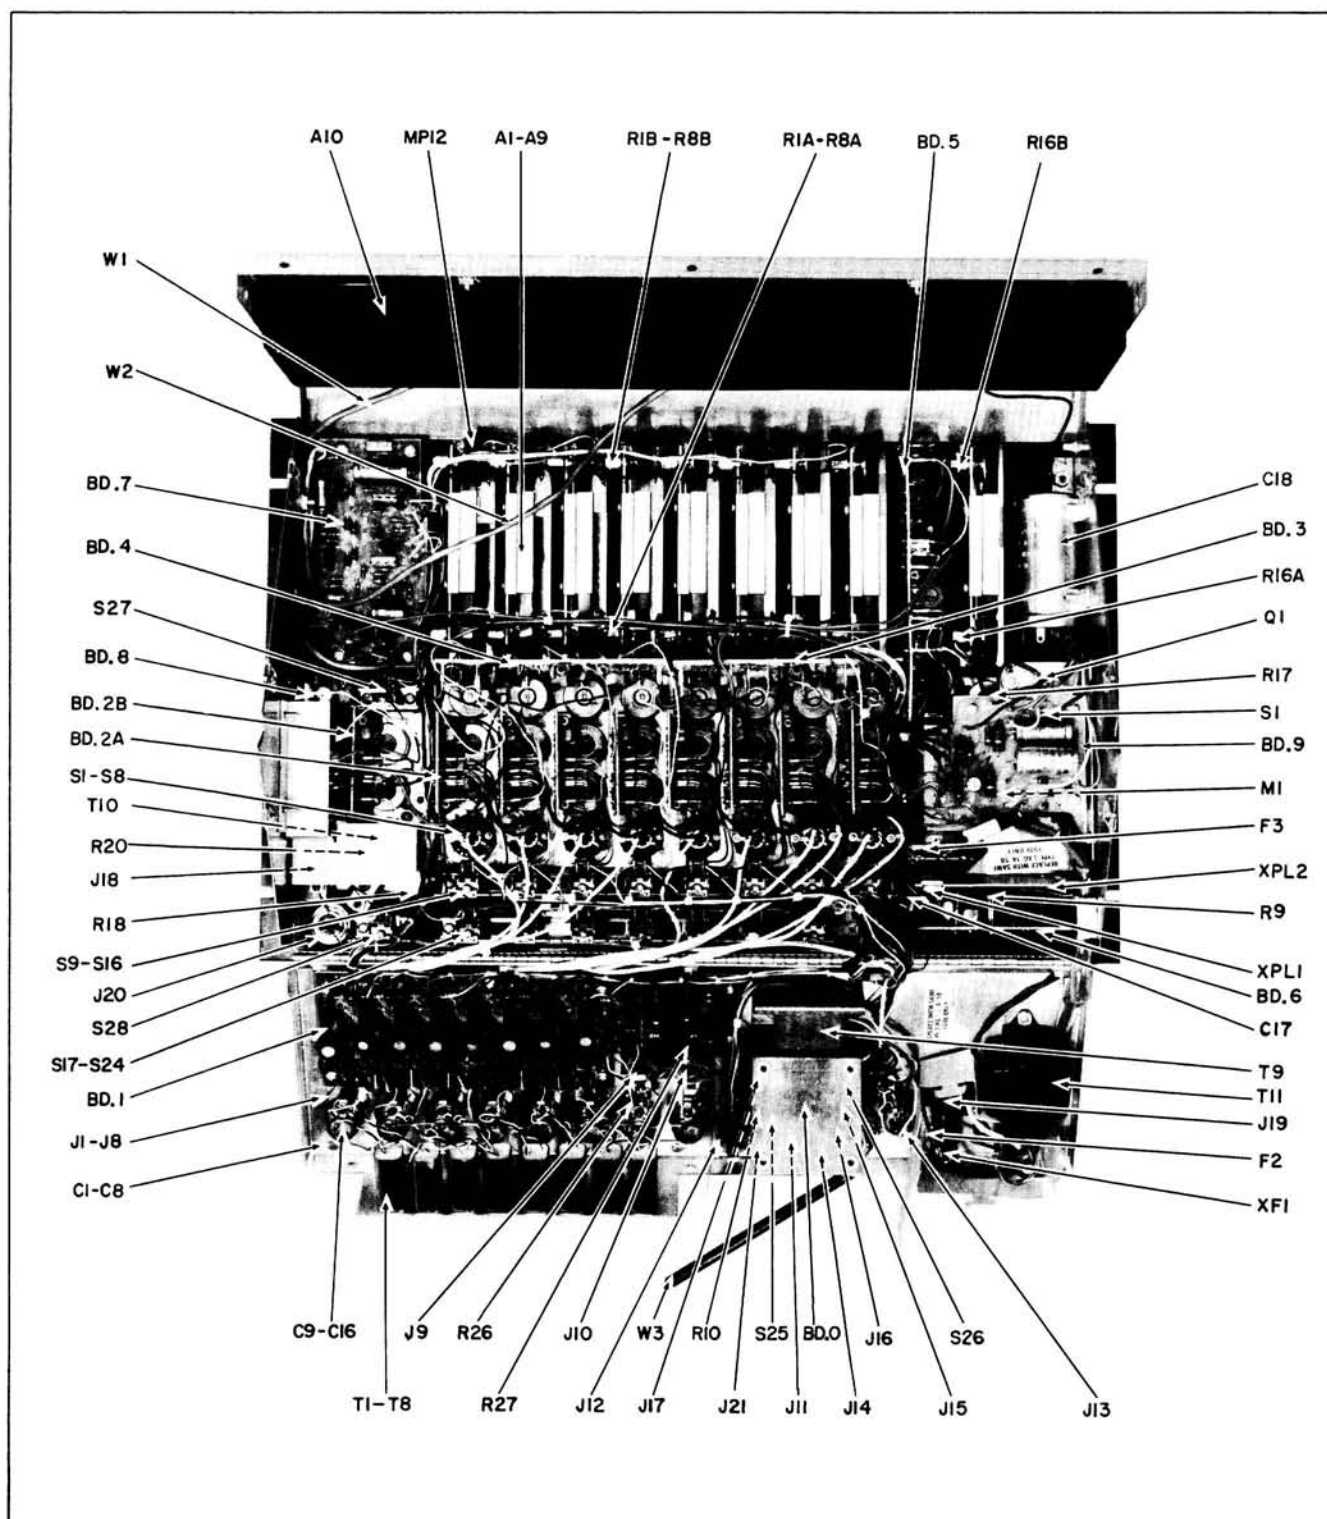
PRINTED CIRCUIT BOARD AND PARTS LOCATION
